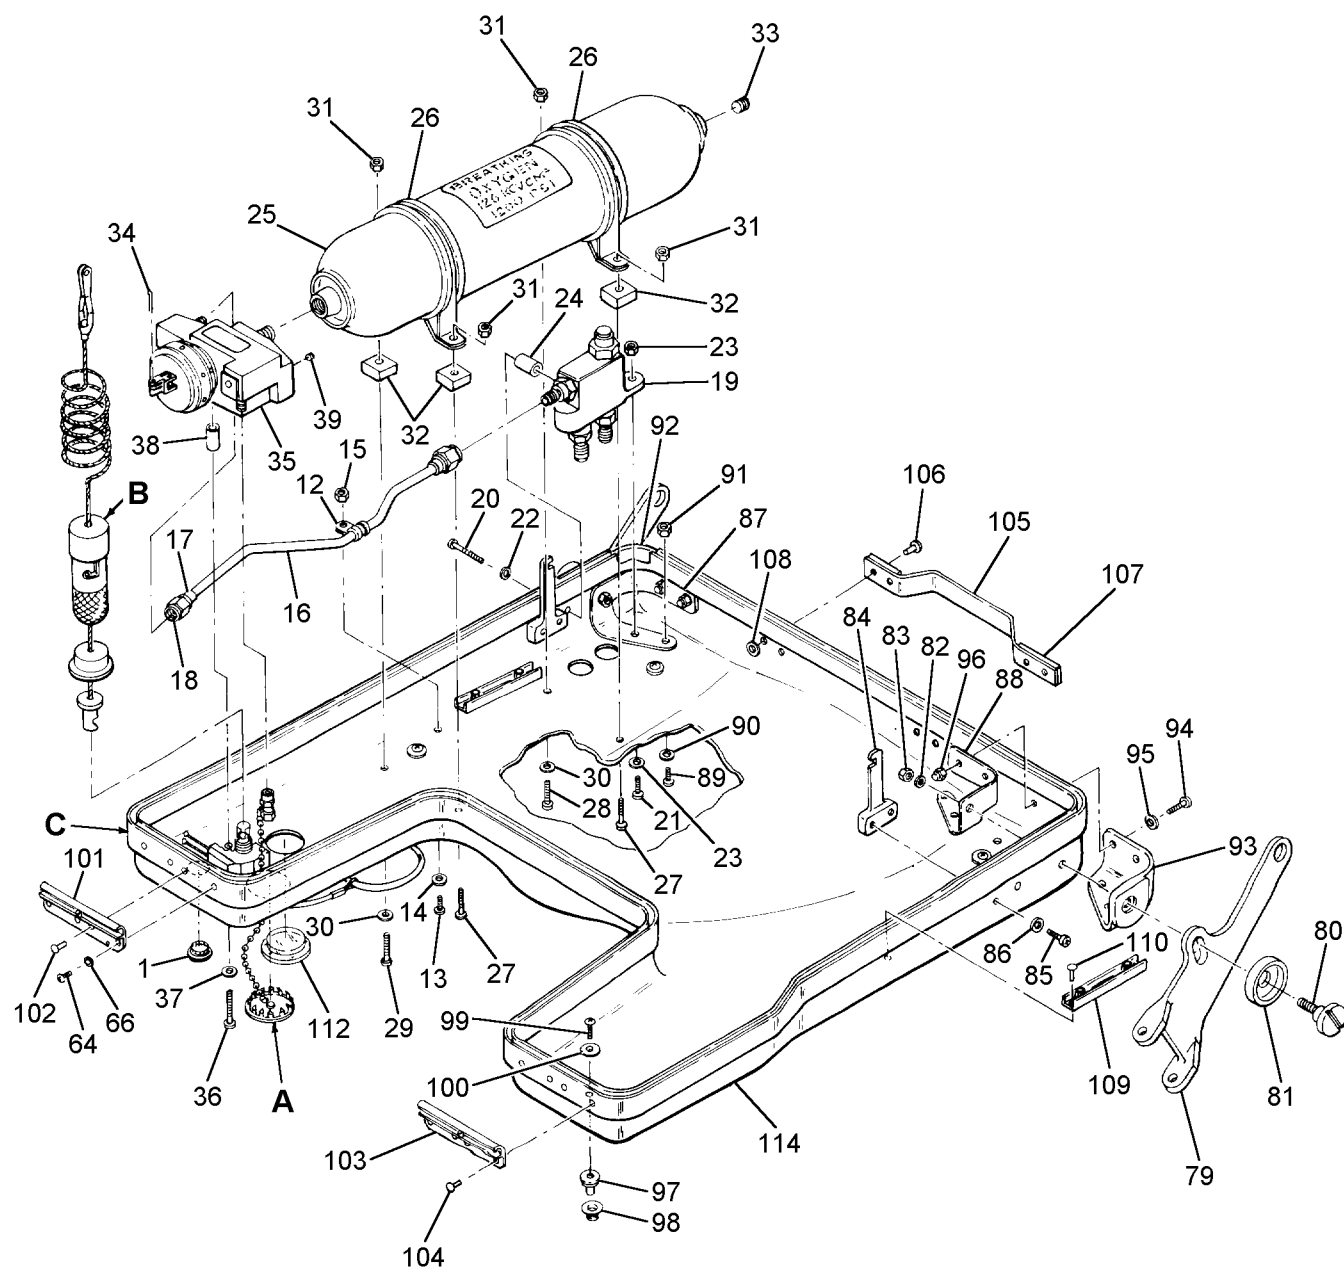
Lid Assembly (Sheet 1 of 2)
